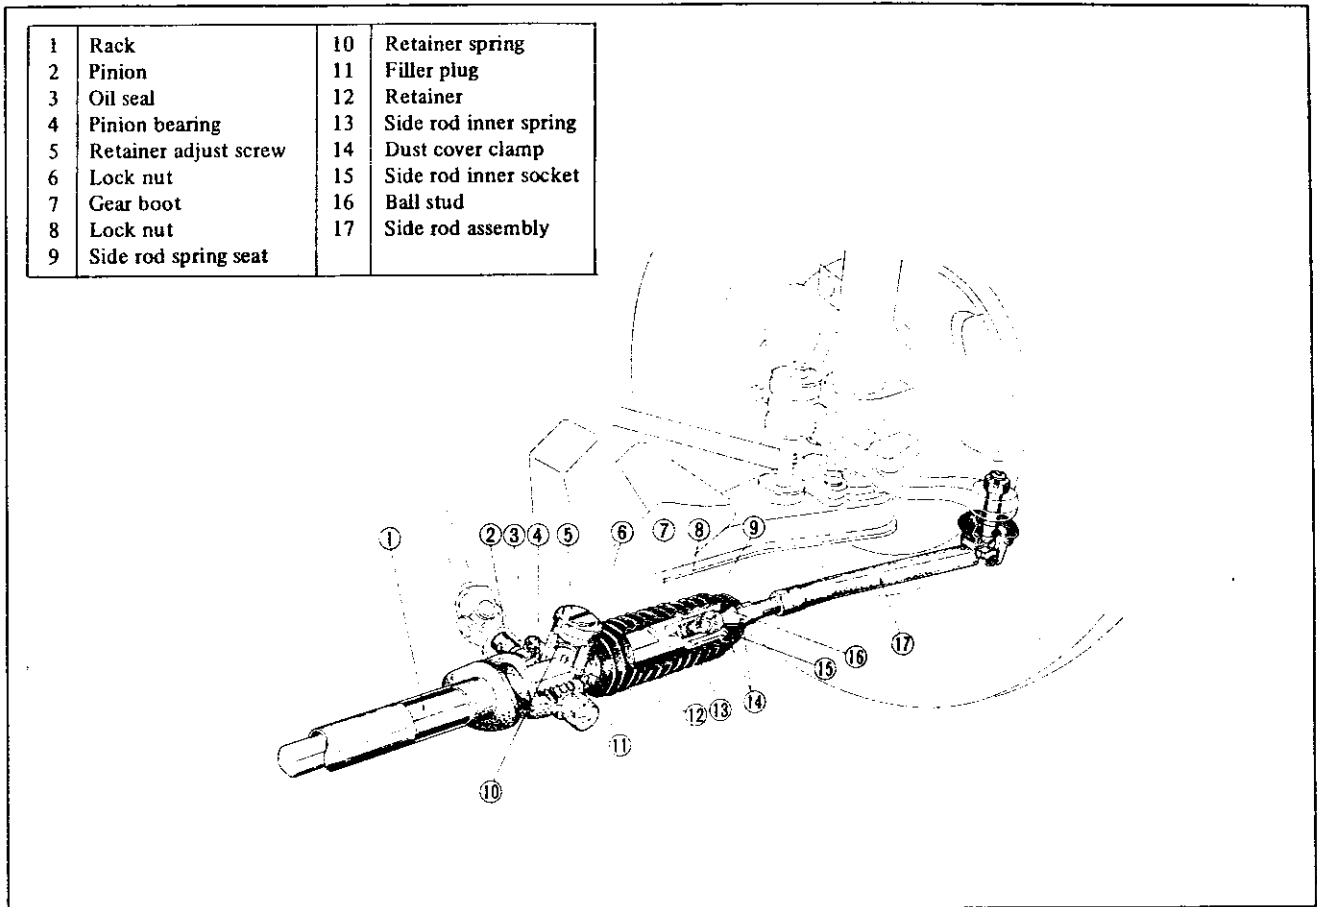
Cross-section of rack-and-pinion with side rod assembly
